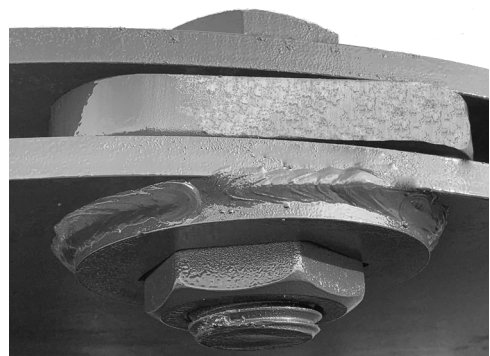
Bolt Head Bead Weld & Assembly
